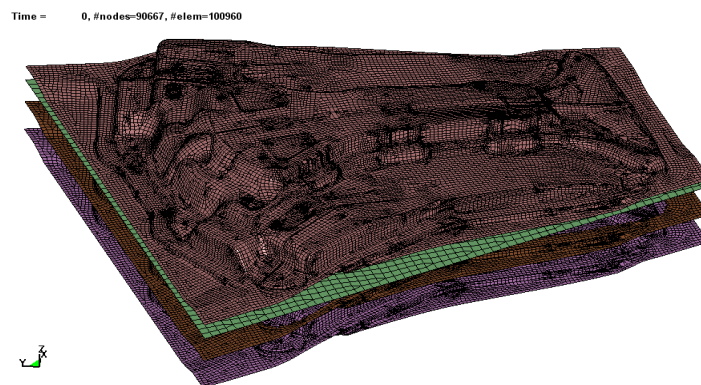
FEM model of an ensemble part - template - punch - pre-shrinking item
